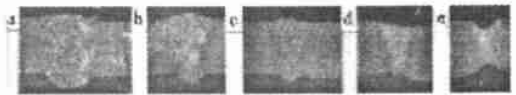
Sections of the weld with fixed gap width, fixed wire feeding speed and variable welding speed
